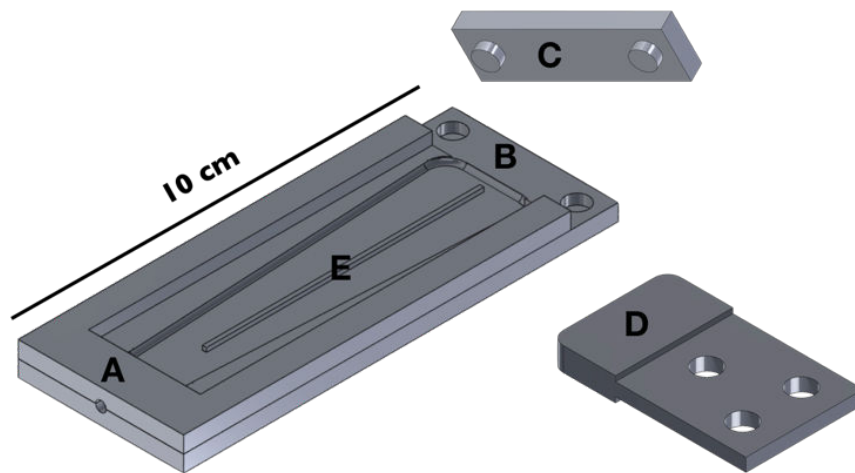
Tail mold design. Tab D can be placed on the gap under part A to allow the thinner part to fit into the tail design and the thicker part to be the piece for the adapter. Shim stock can be placed between B and C and secured by joining the pieces together. The standoff at part E can be used to place material in the middle of the tail.
